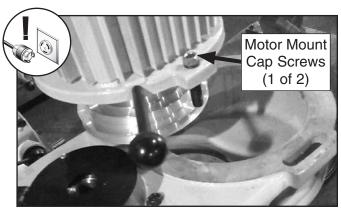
Two cap screws secure the motor to the headstock. Both must be removed.
